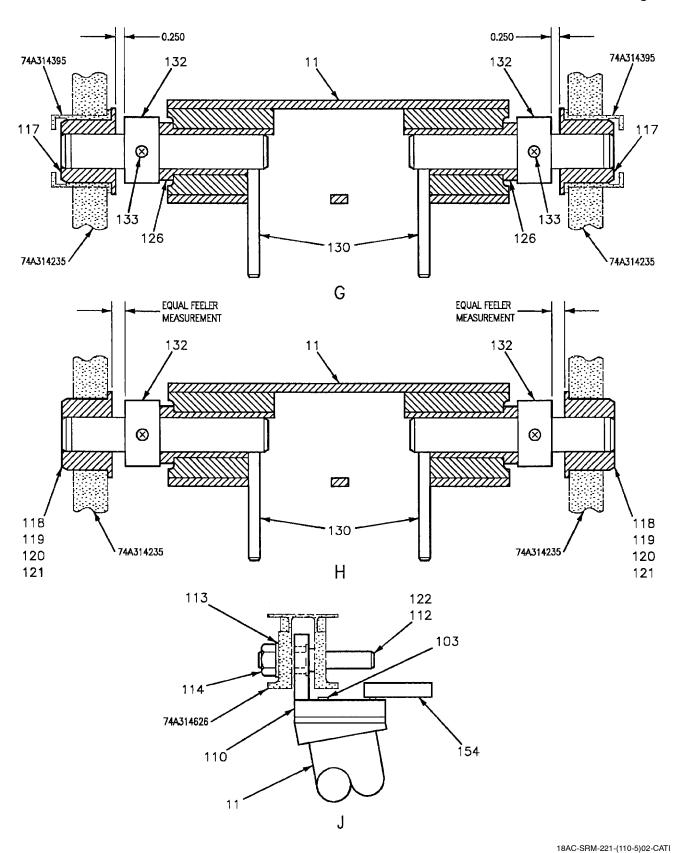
Tool Installation and Alignment Check (Sheet 5)
